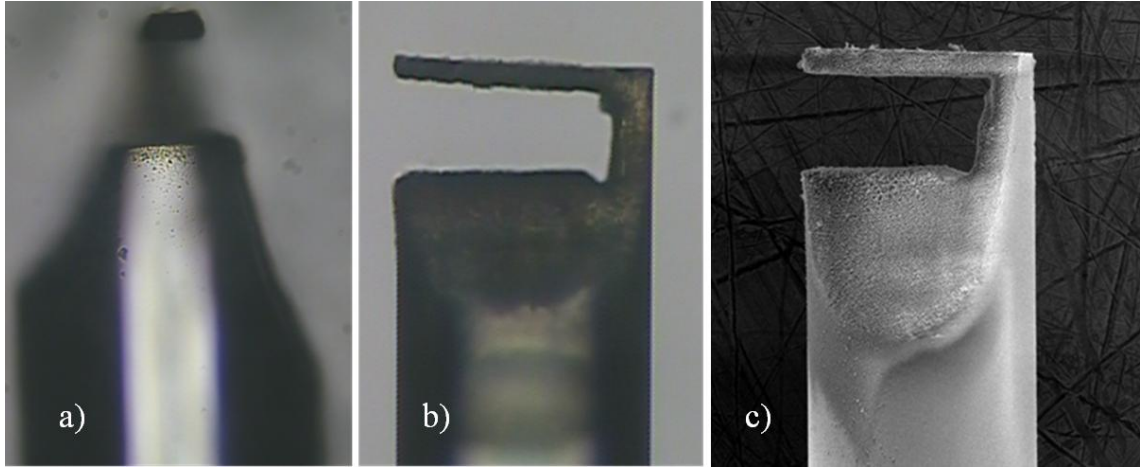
A fibre cantilever machined with correction on both inner surfaces, and (left) indication of parallel surfaces; (right) view rotated by  $90^\circ$  around the fibre axis showing the debris, and indicating the actual shape of the cantilever without debris.
